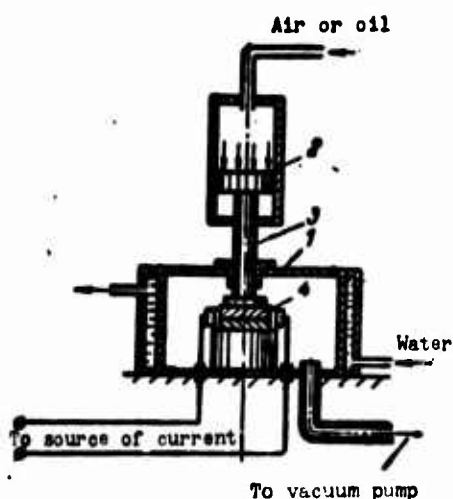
Diagram of installation for diffusion welding: 1 - vacuum welding chamber; 2 - loading device; 3 - current; 4 - welded components.
